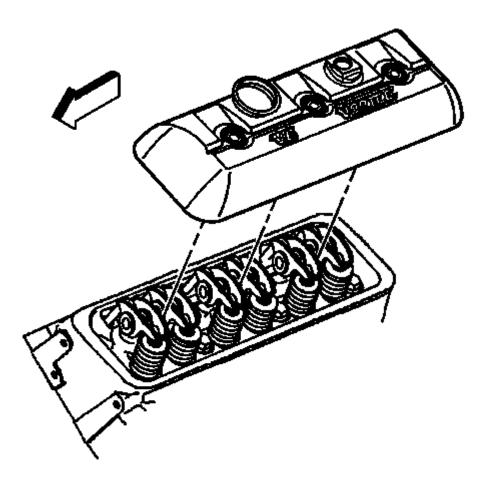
View Of Valve Rocker Arm Cover (Left) Courtesy of GENERAL MOTORS CORP.
